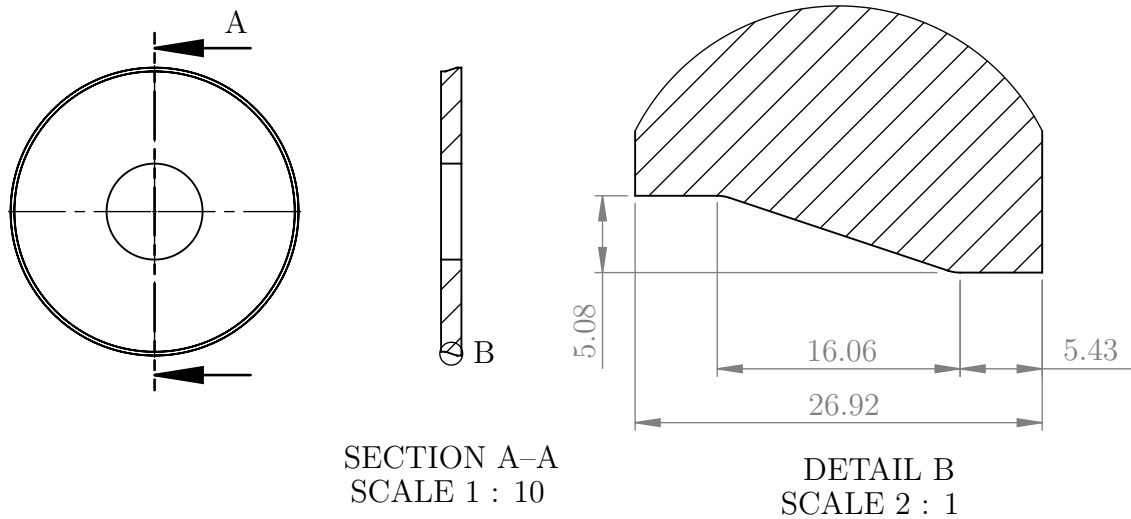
Engineering drawing of the simple wheel profile used to validate EDGR's accuracy.
